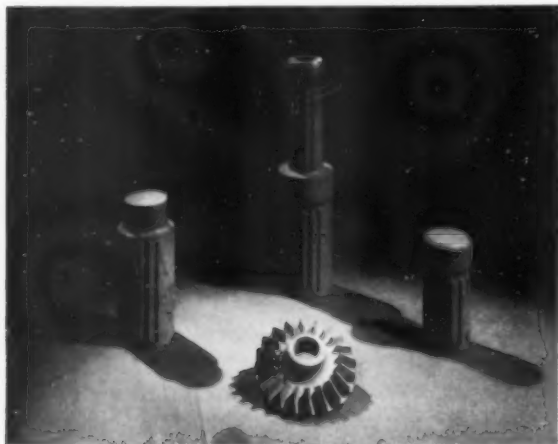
Rotor housings and high-frequency fan rotor for Armstrong-Whitworth (Pneumatic Tools), Ltd. The changeover of these rotor housings to 40E castings from machined solid aluminium alloy bar enabled the designer to introduce internal coring, cast-in steel inserts for the pneumatic hose connection, and the raised fluting, to provide a better grip for the tool operator.
